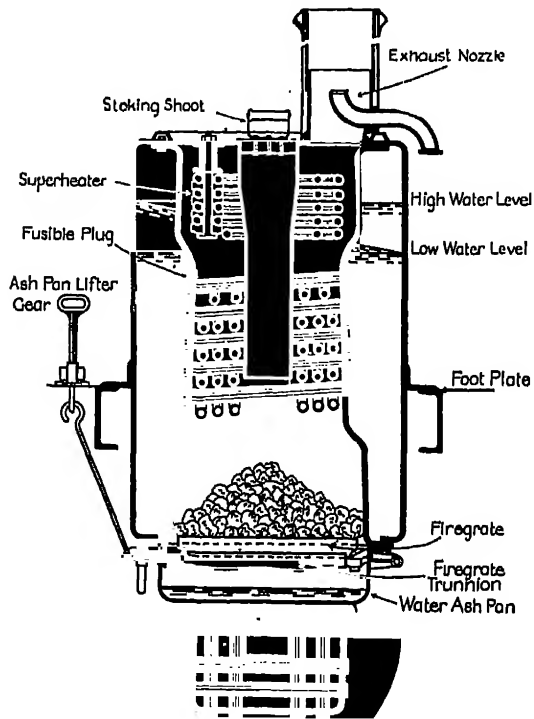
Water-tube Boiler for Sentinel Steam Wagon
